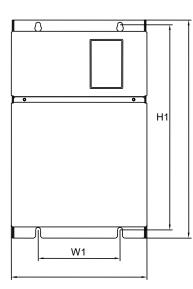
External and mounting dimensions (CT3000 PRO: 15kW to 315kW)
